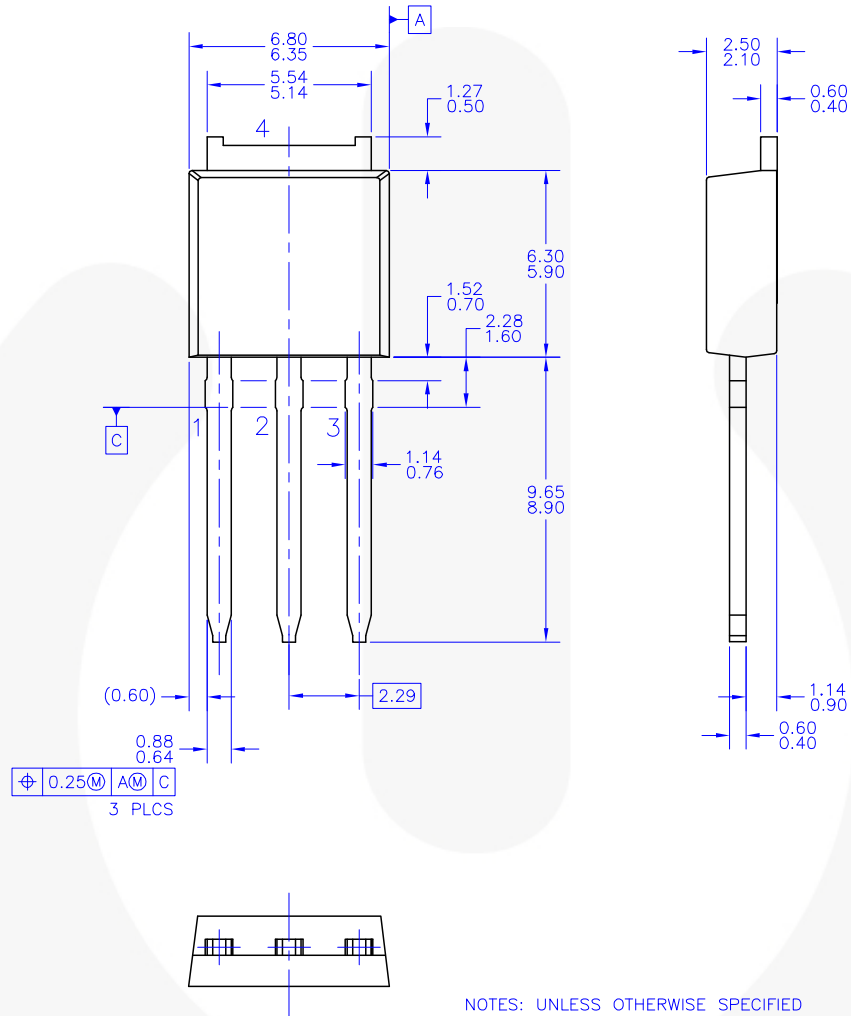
TO-251 (IPAK) MOLDED, 3-LEAD
